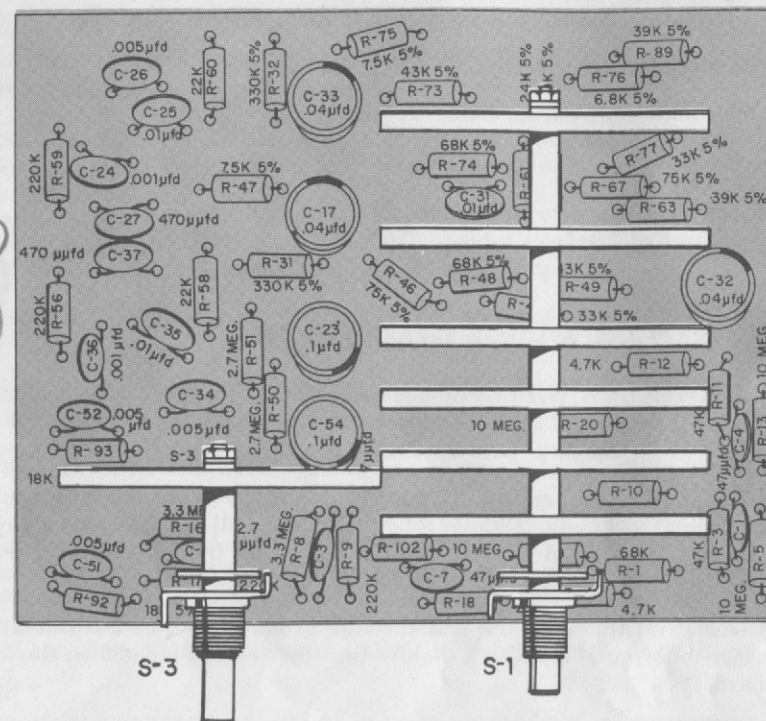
MOUNTING THE PRINTED CIRCUIT SWITCHES
